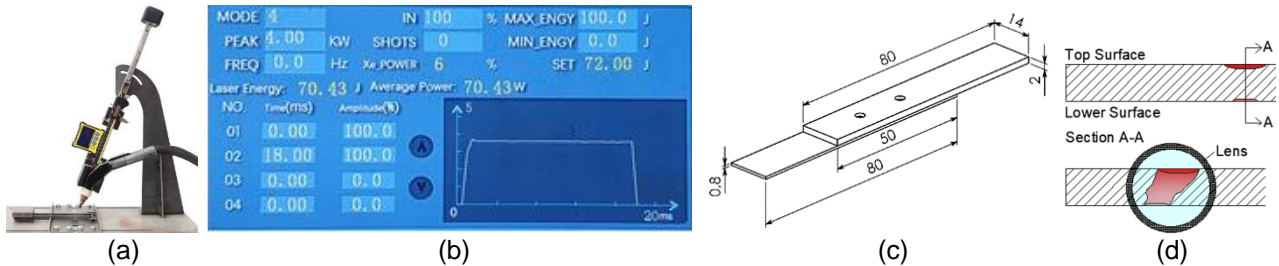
a.) Hand-held welding torch (Turcweld LP300 series) and auxiliary device developed for precise angular and linear positioning of the manual welding torch. b.) Laser welding parameters and signal form. c.) Dimensions of test specimens and welding of 2 mm and 0.8 mm 304 series stainless steel test specimens from two points, d.) Cross-section of the 2 mm thick upper sheet's weld melting zone.
